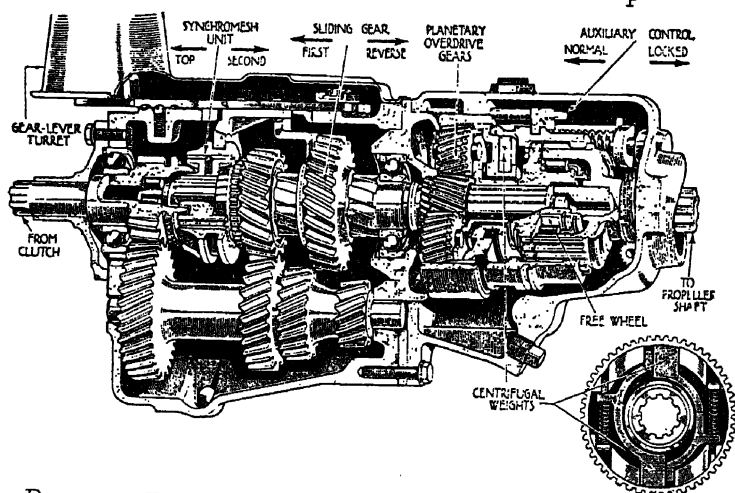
The Riley Overdrive Gearbox with Free-wheel Unit.
